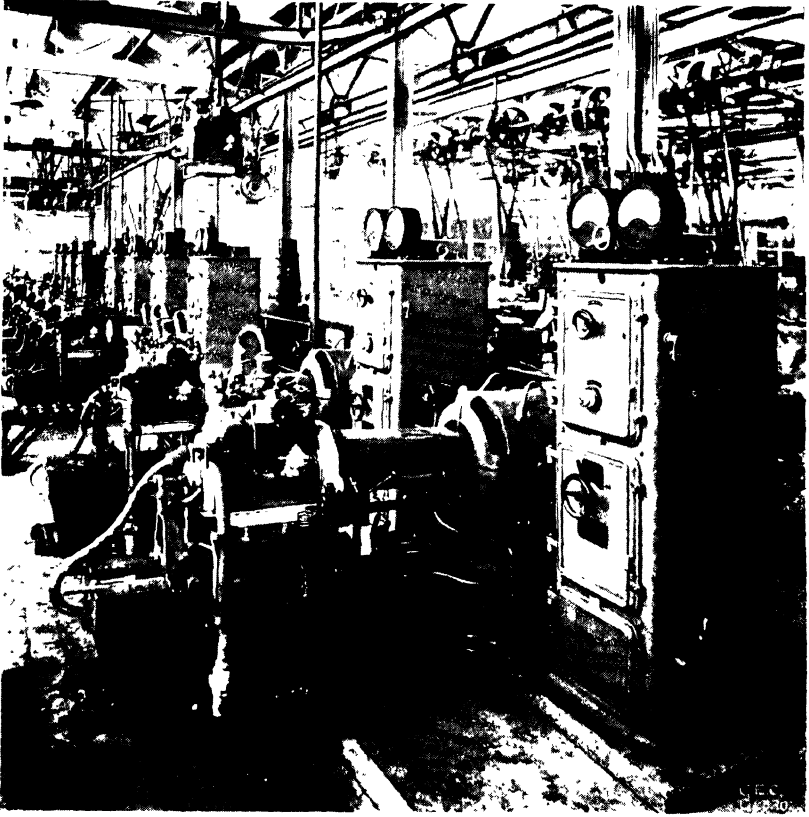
Part of the Austin Motor Company's testing department for automobile engines.
